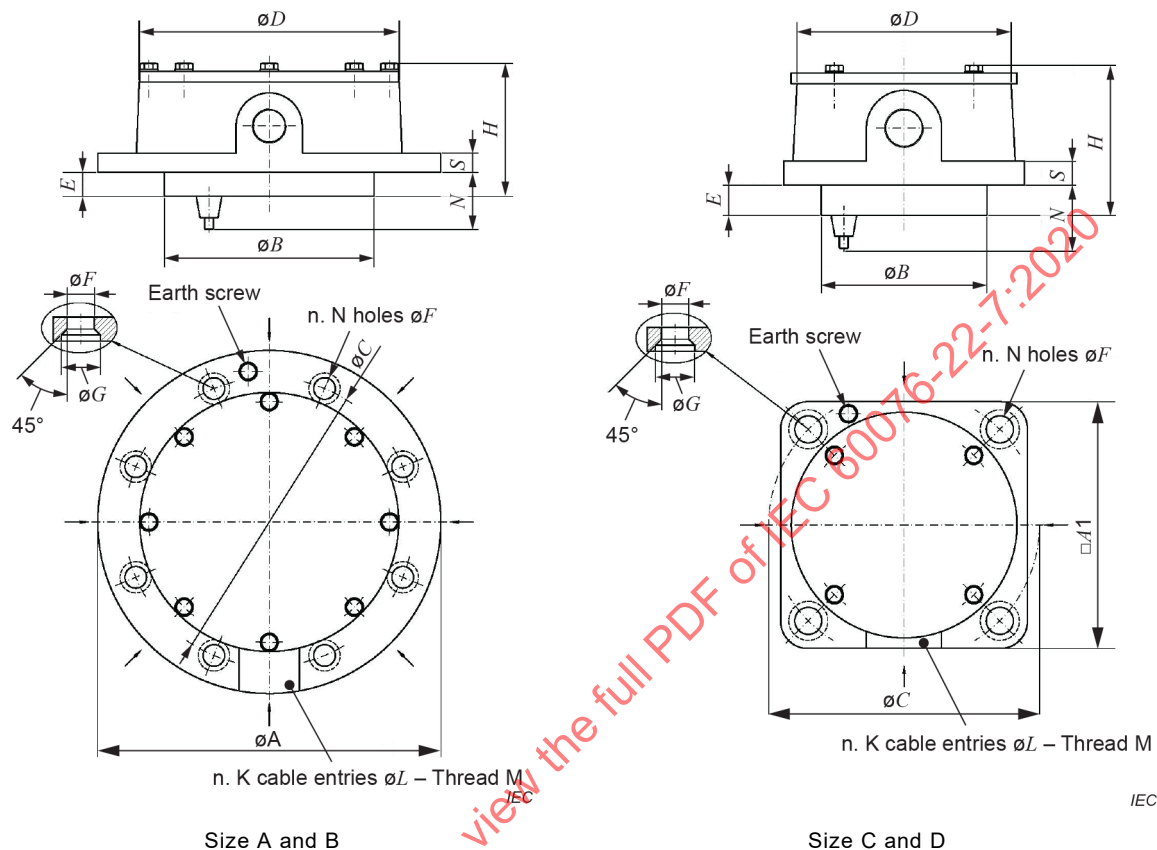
Dimensions of terminal boxes size A, B, C and D
